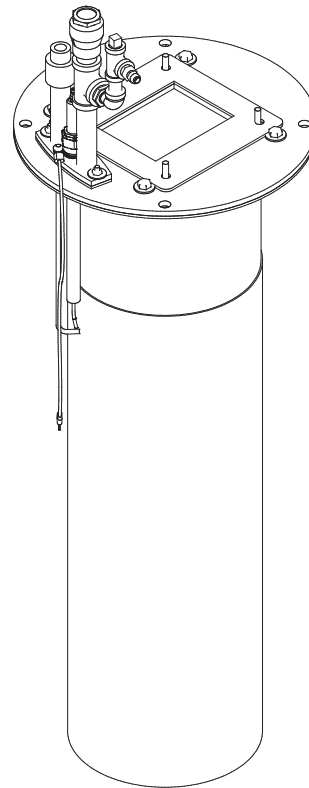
BURNER WITH IGNITION ASSEMBLY MOUNTED
